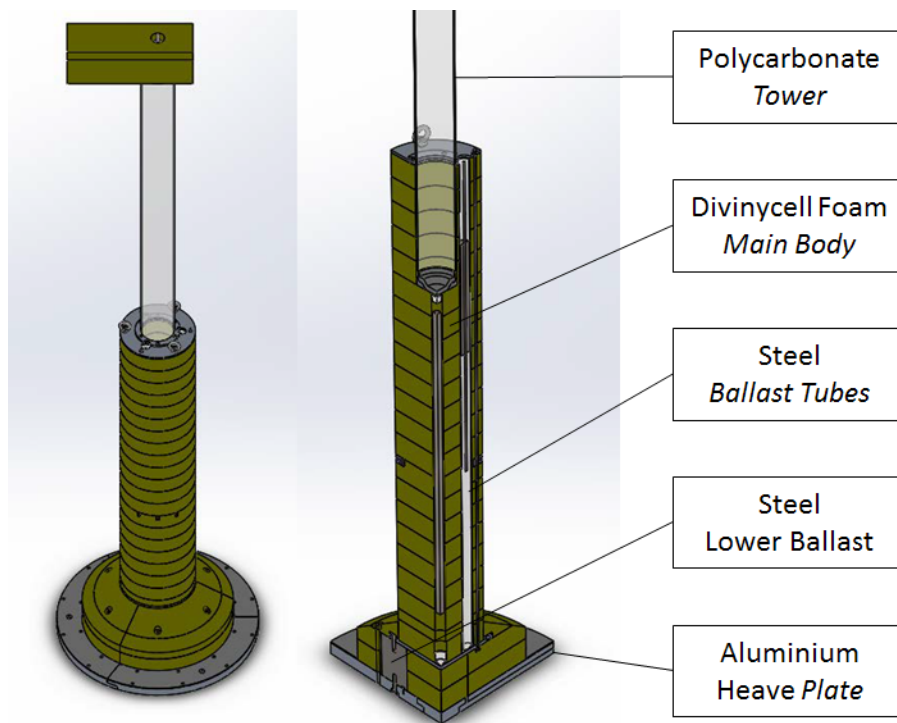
Manufacture design of the DTI-F. The drawing on the right is a quadrant showing the inner structure.
